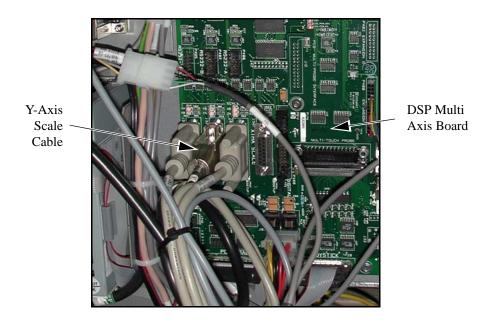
Disconnecting the Y-Axis Scale Cable from the DSP Multi Axis PCBA
